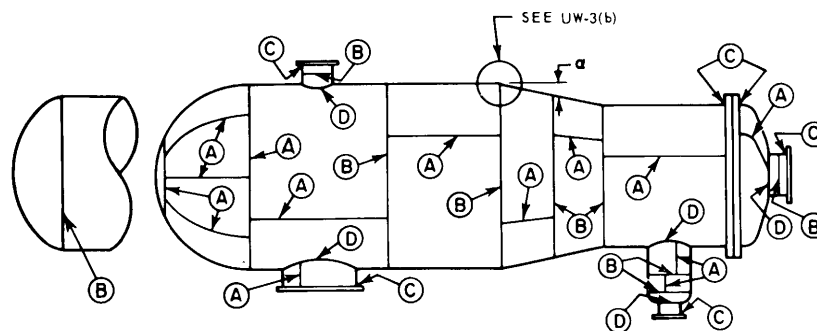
ILLUSTRATION OF WELDED JOINT LOCATIONS TYPICAL OF CATEGORIES A, B, C, AND D
